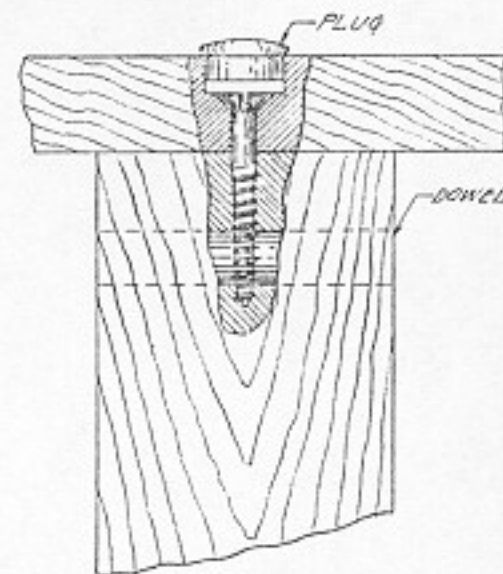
Screw in end wood passing through dowel. Screw set below surface and hole plugged.
